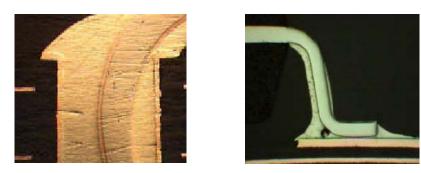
Typical Solder Joints for Both Through-hole and Surface Mount Connections
